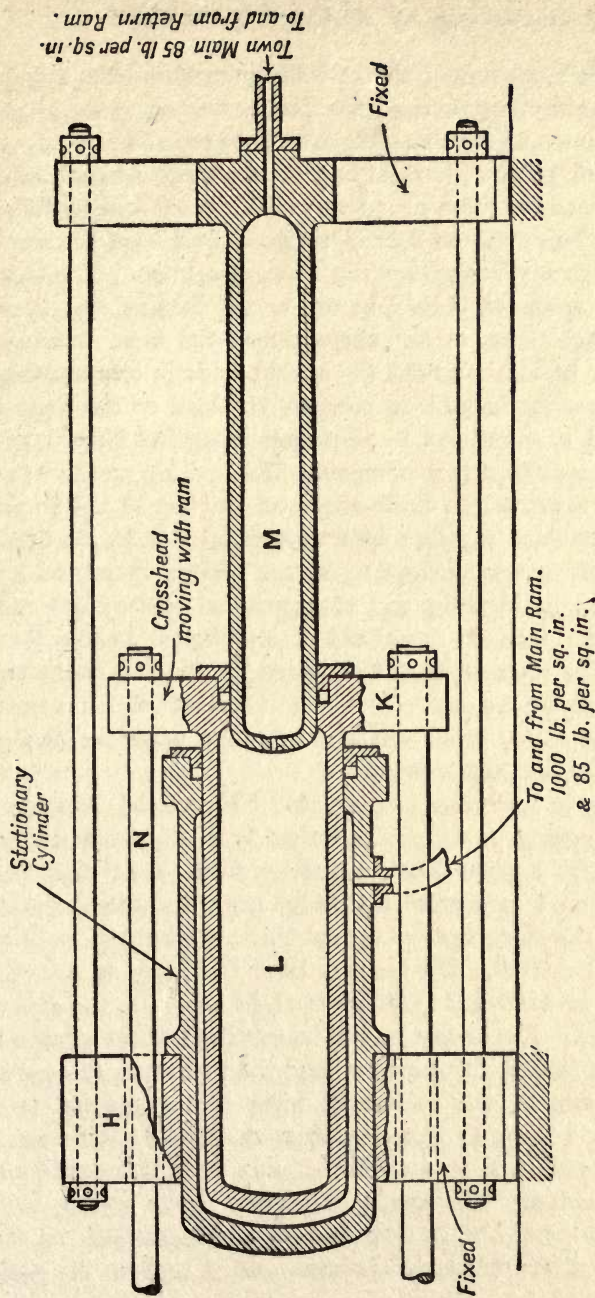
Details of Main Ram on Birmingham 300-ton Machine.
